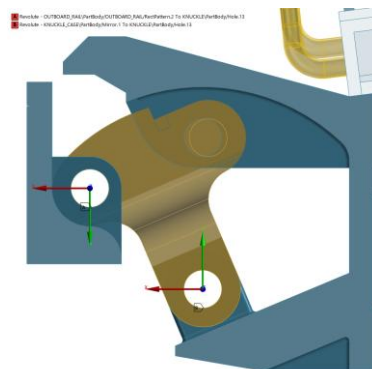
Revolute joints set between knuckle outer pin holes-outboard rail holes, knuckle winding shaft holes-knuckle case winding shaft holes
